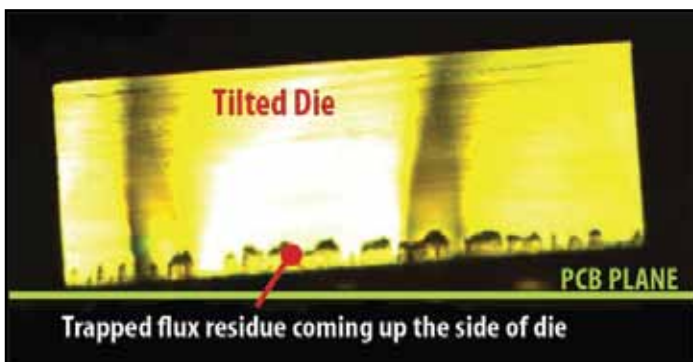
Side view of an eGaN FET with severe die tilt after soldering
